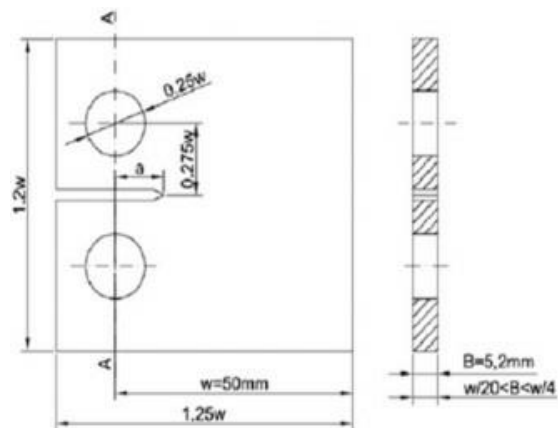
ASTM standard for fracture test specimen is ASTM C1421-18 with specified tolerances.
